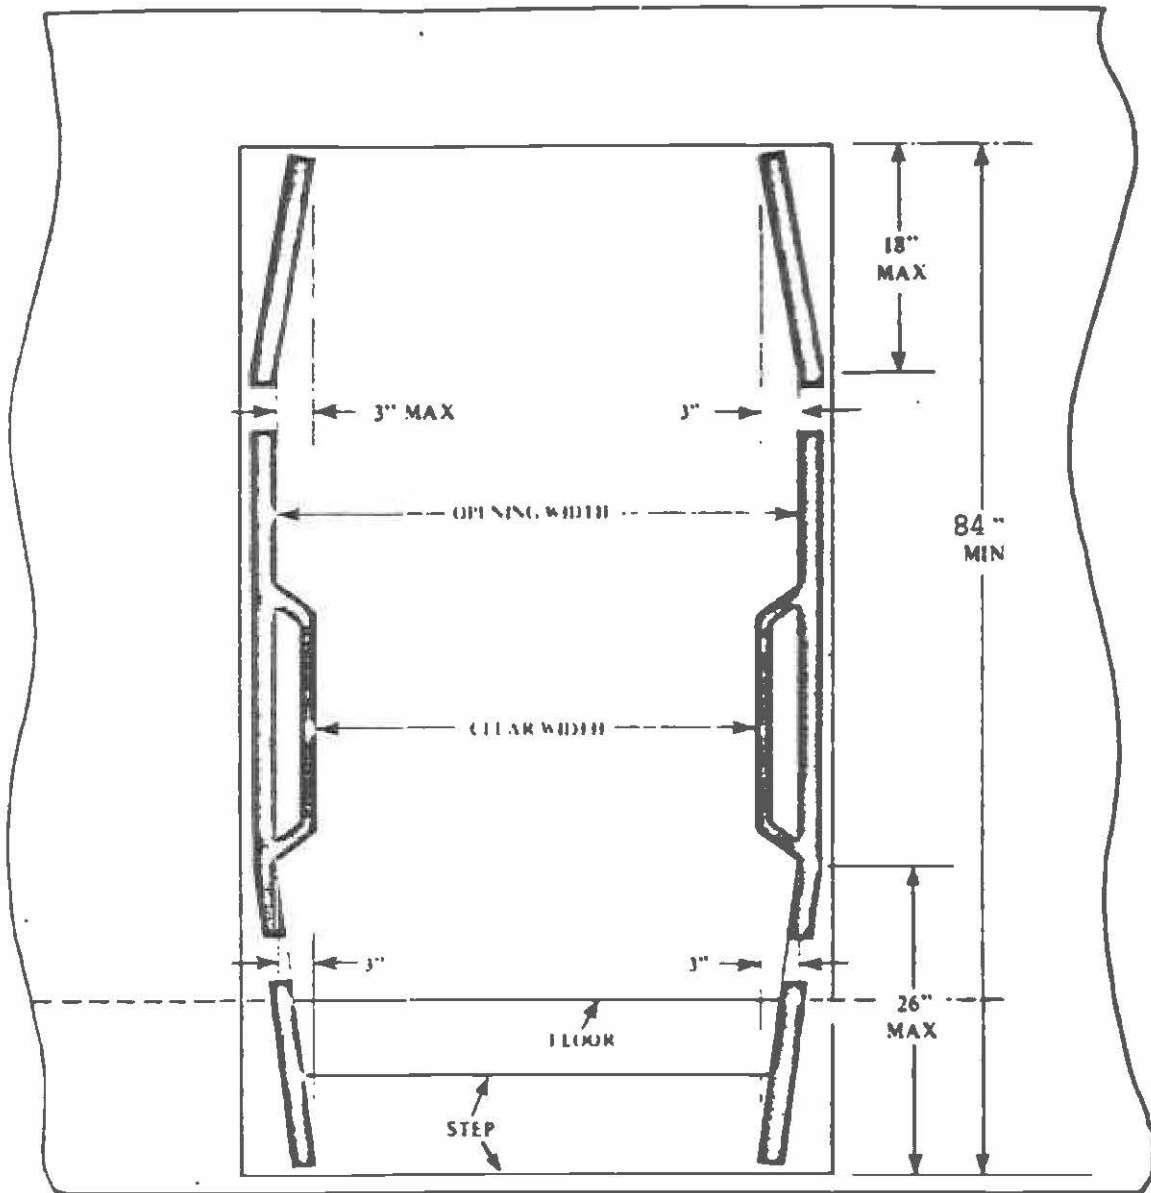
TRANSIT COACH MINIMUM DOOR OPENING
